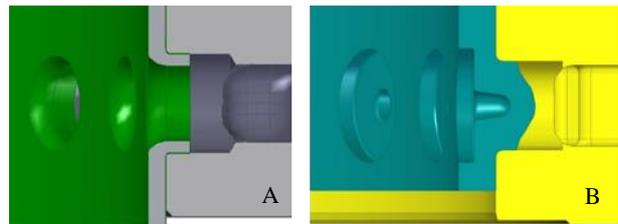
Locking pins in the plug-in brake discs: A steel hub; B aluminium hub
